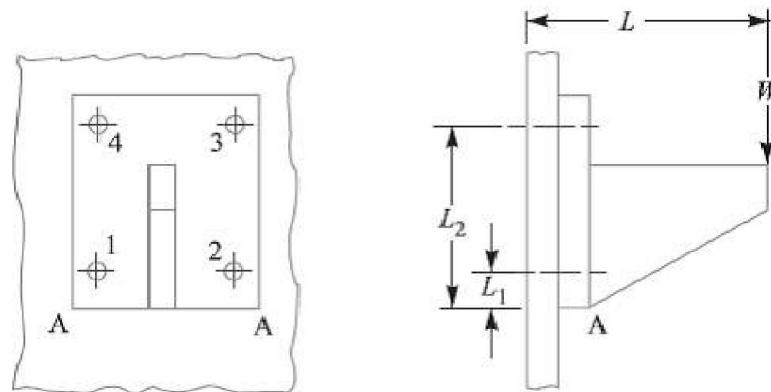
Eccentric load perpendicular to the axis of bolts.
